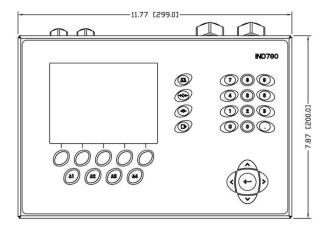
IND780 Harsh Enclosure Terminal Dimensions, Front
